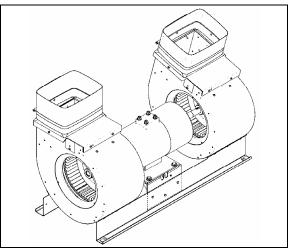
EVAPORATOR MOTOR ASSEMBLY 22316
